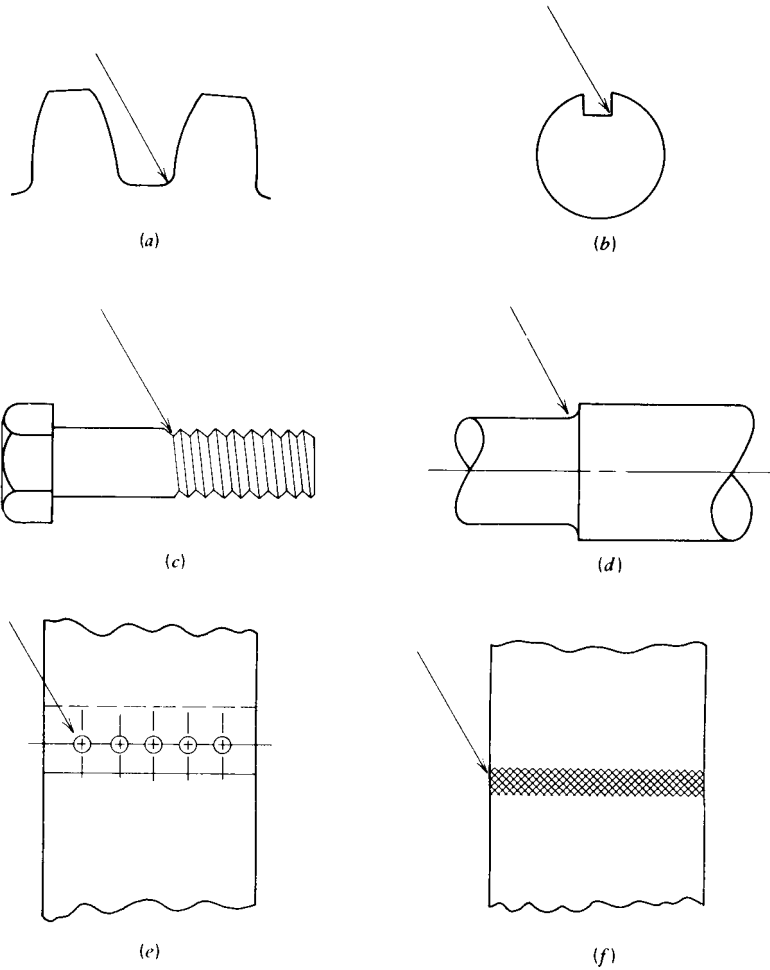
Some common examples of stress concentration. (a) Gear teeth. (b) Shaft keyway. (c) Bolt threads. (d) Shaft shoulder. (e) Riveted or bolted joint. (f) Welded joint.
